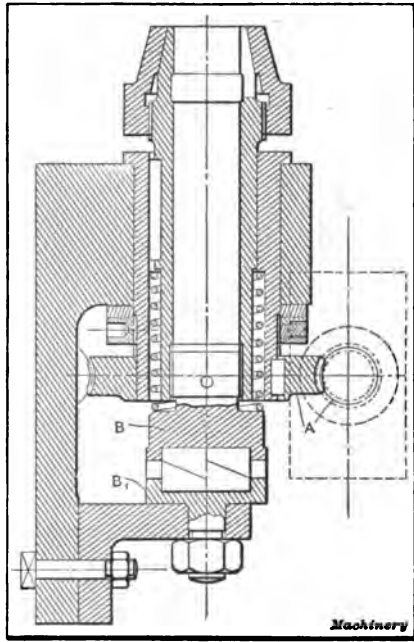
Vertical Section of Fixture shown in Fig. 17
